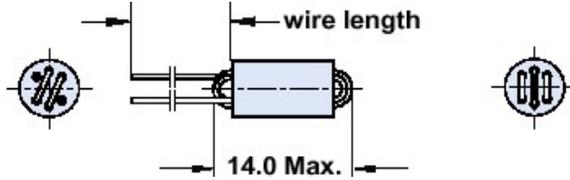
The wound bead used in the isolators. Dimensions are mm
